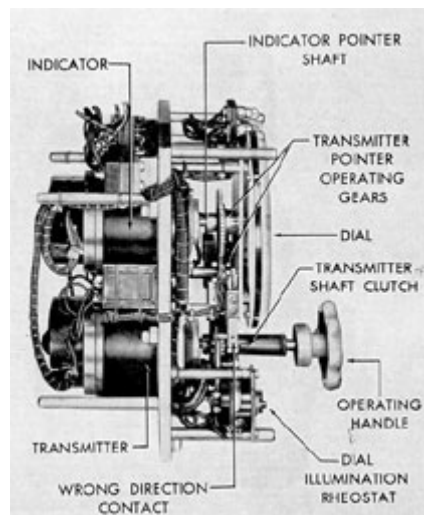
Side view of motor order telegraph transmitter indicator unit, maneuvering room.
